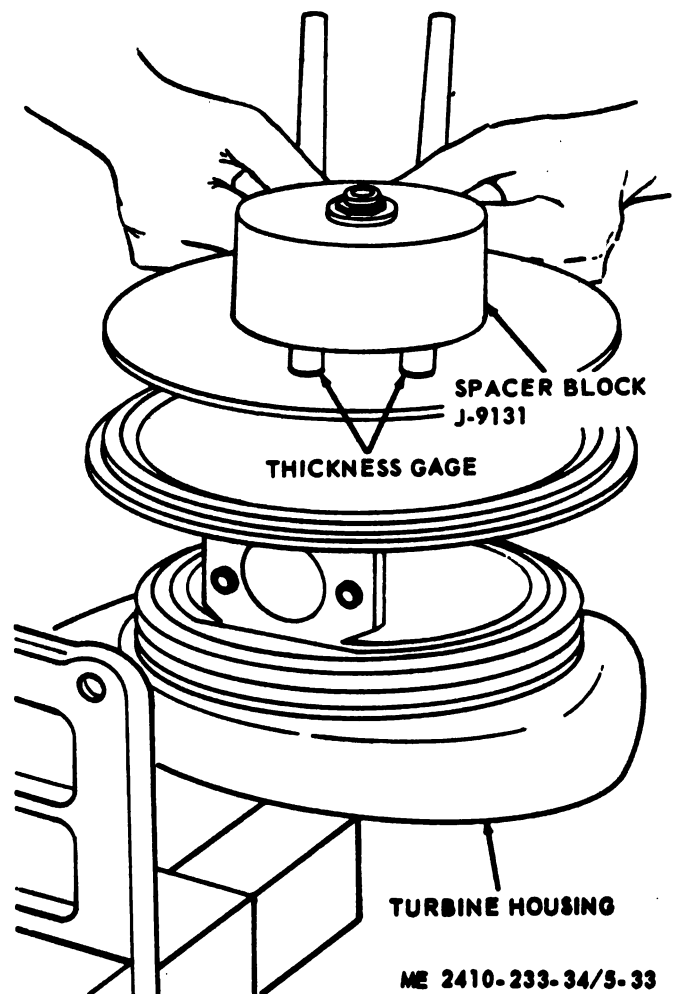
Turbocharger clearance check, between spacer block and housing face.
